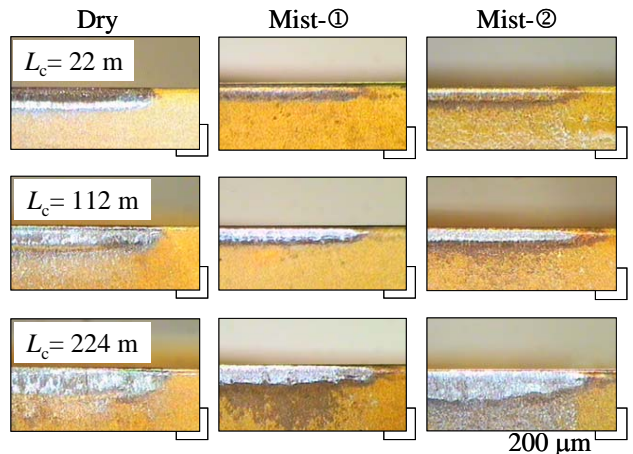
Photographs of typical flank wear of TiAlN-coated carbide tool
